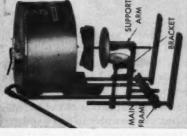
Original Construction of Seedmaster, frame built by Corson Brothers, Inc. Weighed 23 pounds, was subject to fracture.
